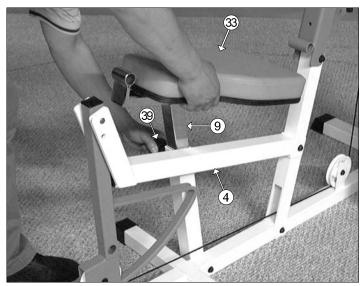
Insert the Bench Press Adj. Seat Frame (#9) into the Leg Extension Bench Frame (#4), in the position as shown above. Be sure to release the Turn/Pull Pin w/Knob (#39) as you begin to insert the assembled Bench Press Adj. Seat Frame (#9) into the Leg Extension Bench Frame (#4).
